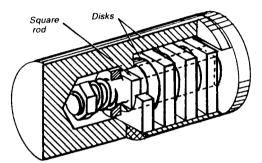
Friction disks are compressed by an adjustable spring. Square disks lock into the square hole in the left shaft, and round disks lock onto the square rod on the right shaft.
